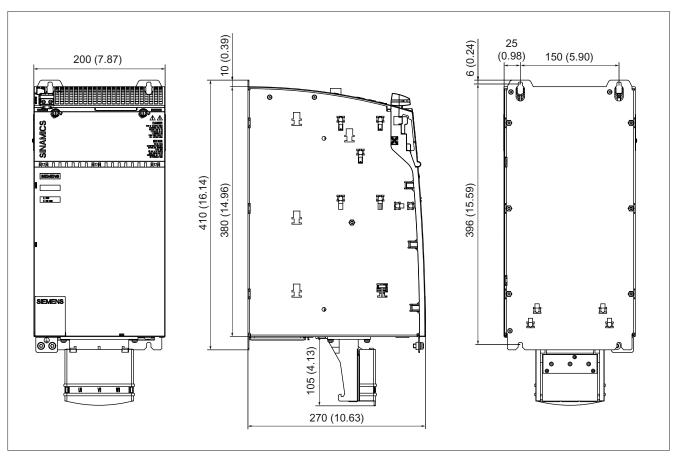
Dimension drawing of 55 kW Smart Line Module with internal air cooling, all dimensions in mm and (inches)
